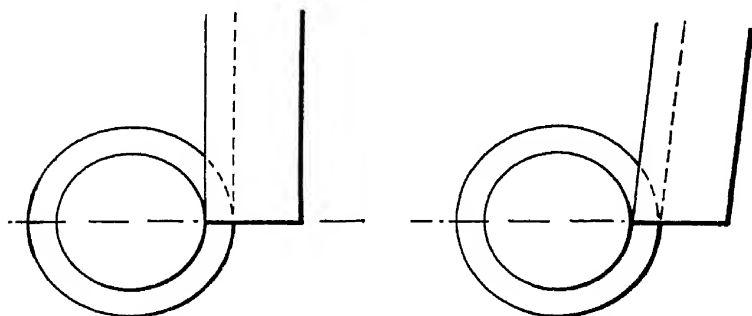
SHOWING RELIEF CLEARANCE GIVEN TOOL WHEN THE JOB HAS SHOULDERS
